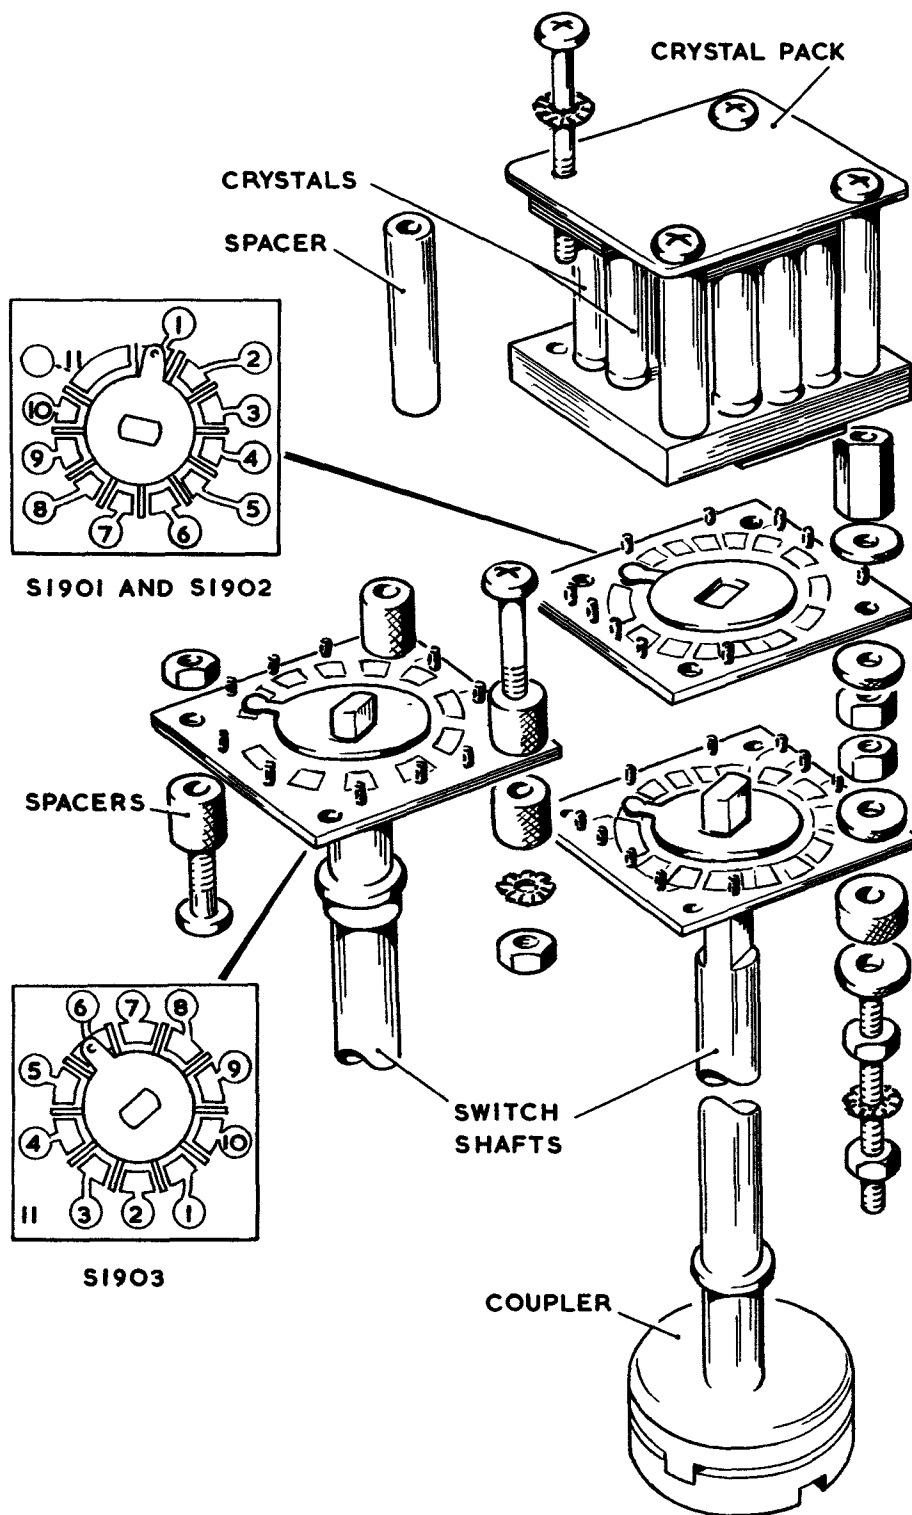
Exploded view of switches SI901, SI902 and SI903
